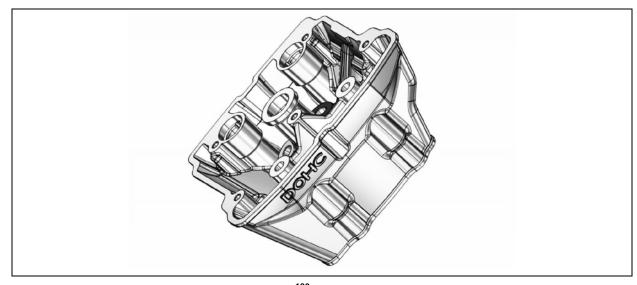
Cylinder Head (XY150) - Upper Side 186
